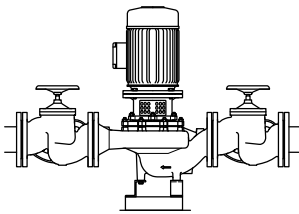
Vertical installation / mounted on three angle feet (steel 37, accessory), sizes 032-032-160 to 100-100-125
